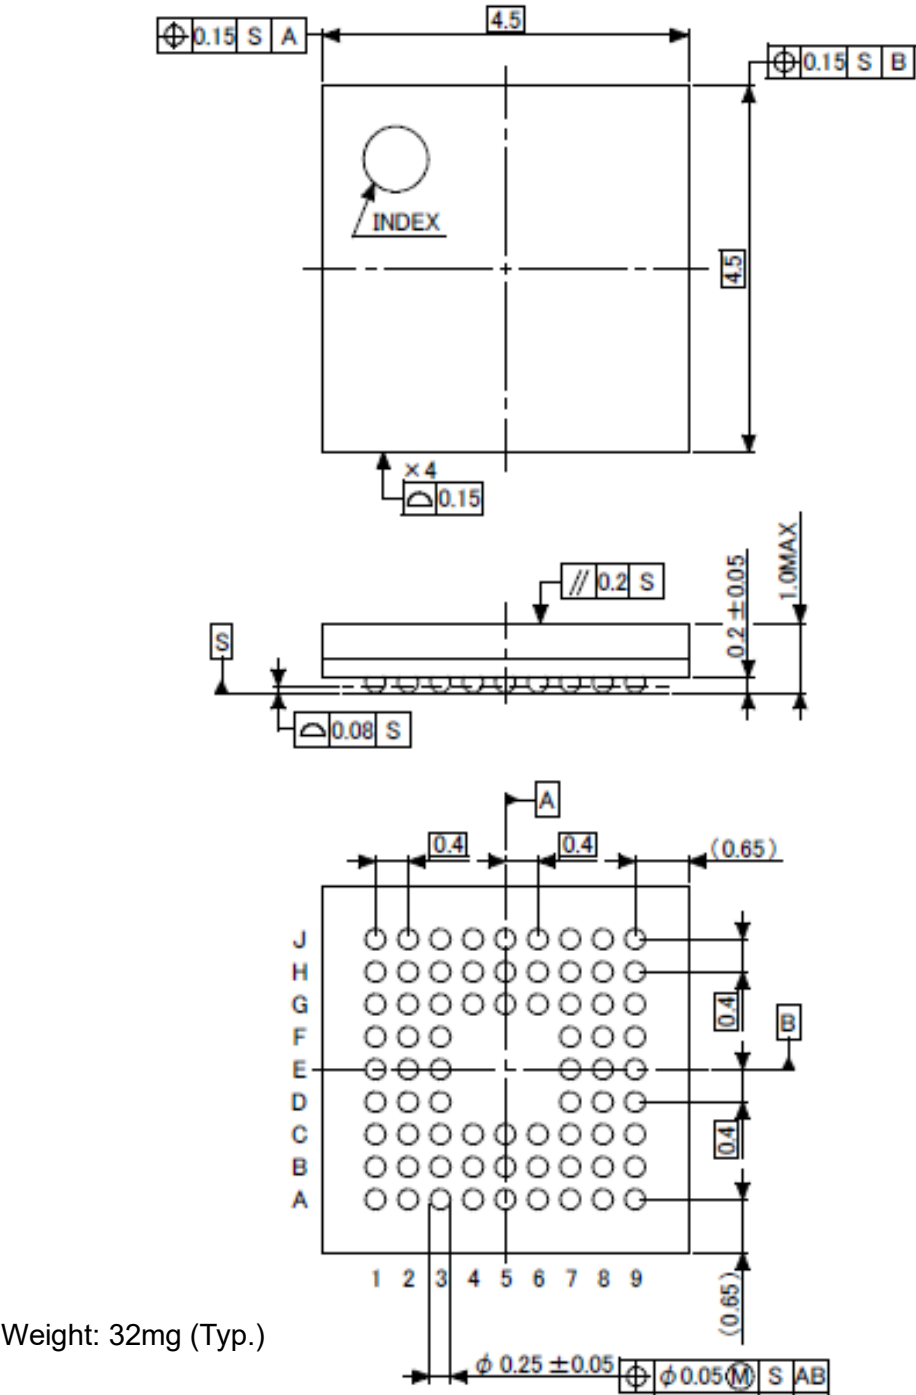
P-VFBGA72-0404-0.40A3 package
